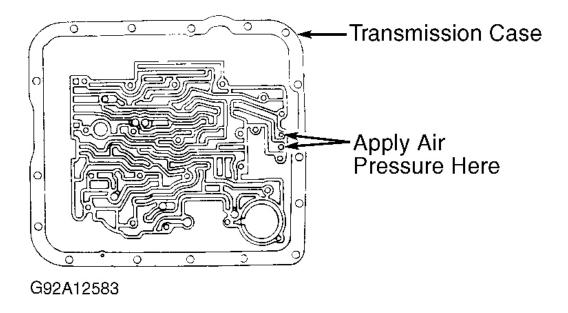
Removing Low-Reverse Clutch Piston Courtesy of GENERAL MOTORS CORP.
